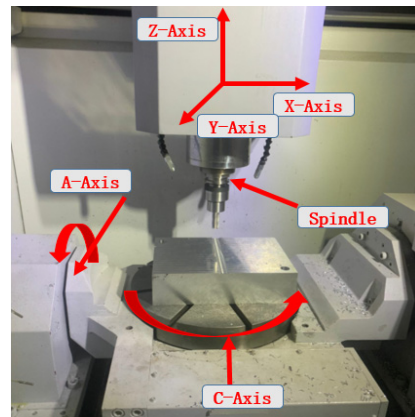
The configuration of a five-axis machine tool considered in this paper.
